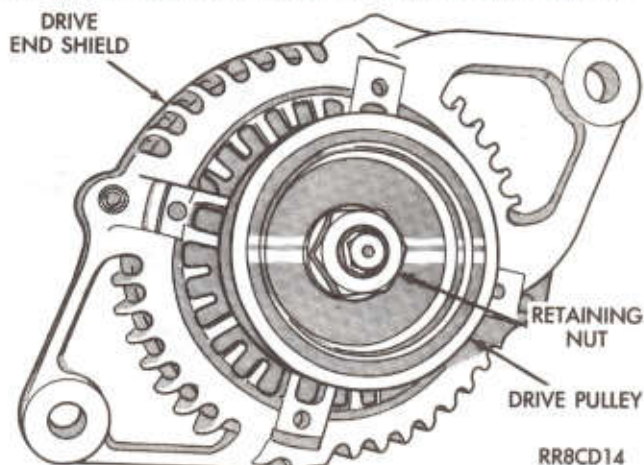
Remove or Install Drive Pulley Attaching Nut
